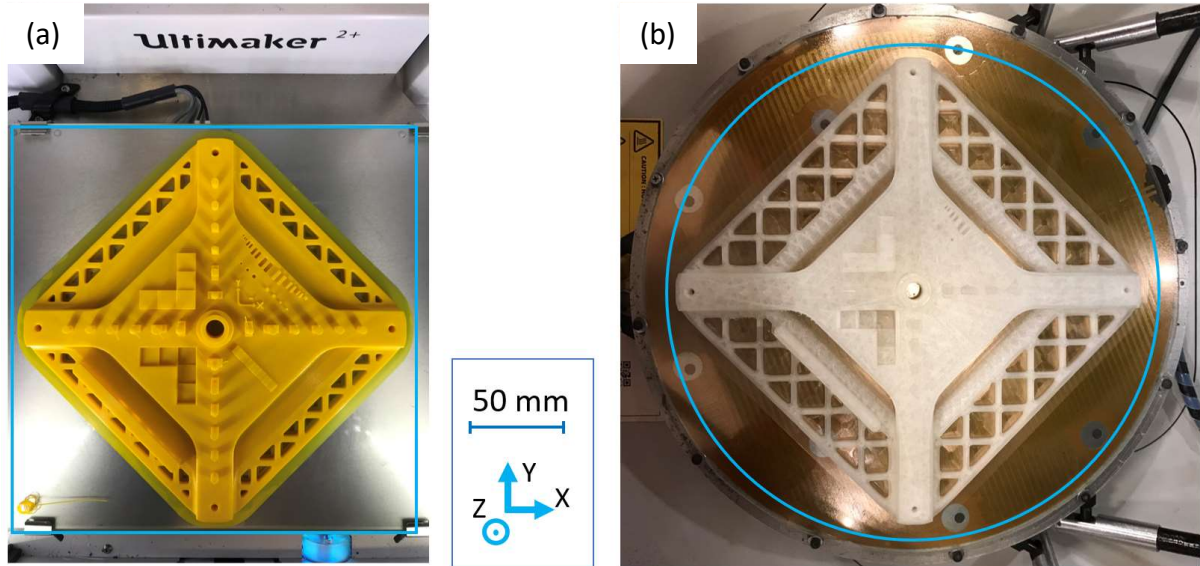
Final Ultimaker 2+ (a) and Pollen (b) printed parts.
